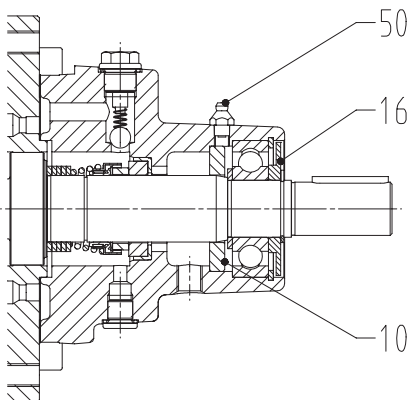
SN..ER..E, external bearing, capable of relubrication, mechanical seal
